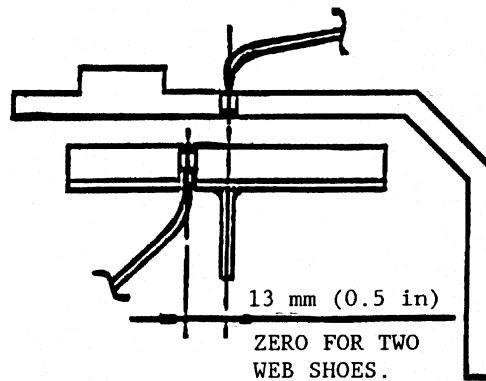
DRUM THERMOCOUPLE AND SINGLE WEB SHOE THERMOCOUPLE LOCATION
